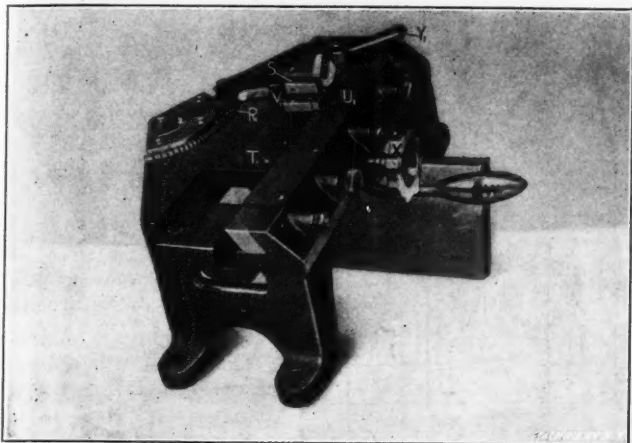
Bending and Inspection Die for Final Operation on Cam Levers
